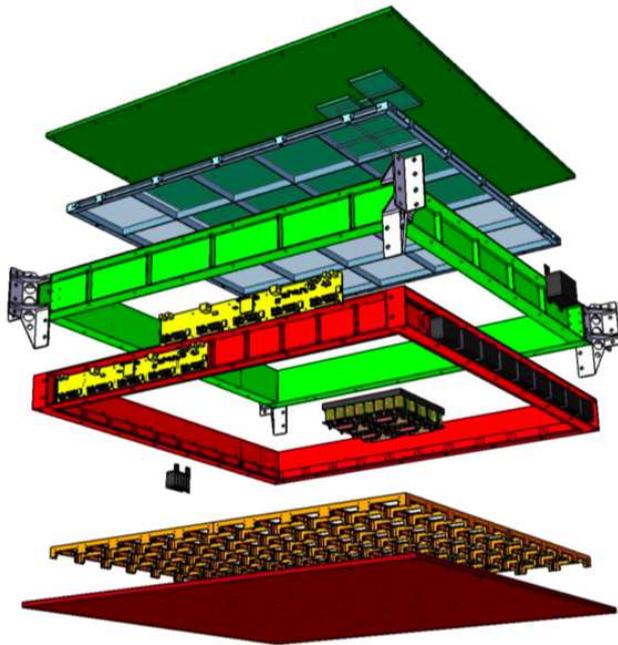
Exploded CAD view of the CherCam mechanical structure
